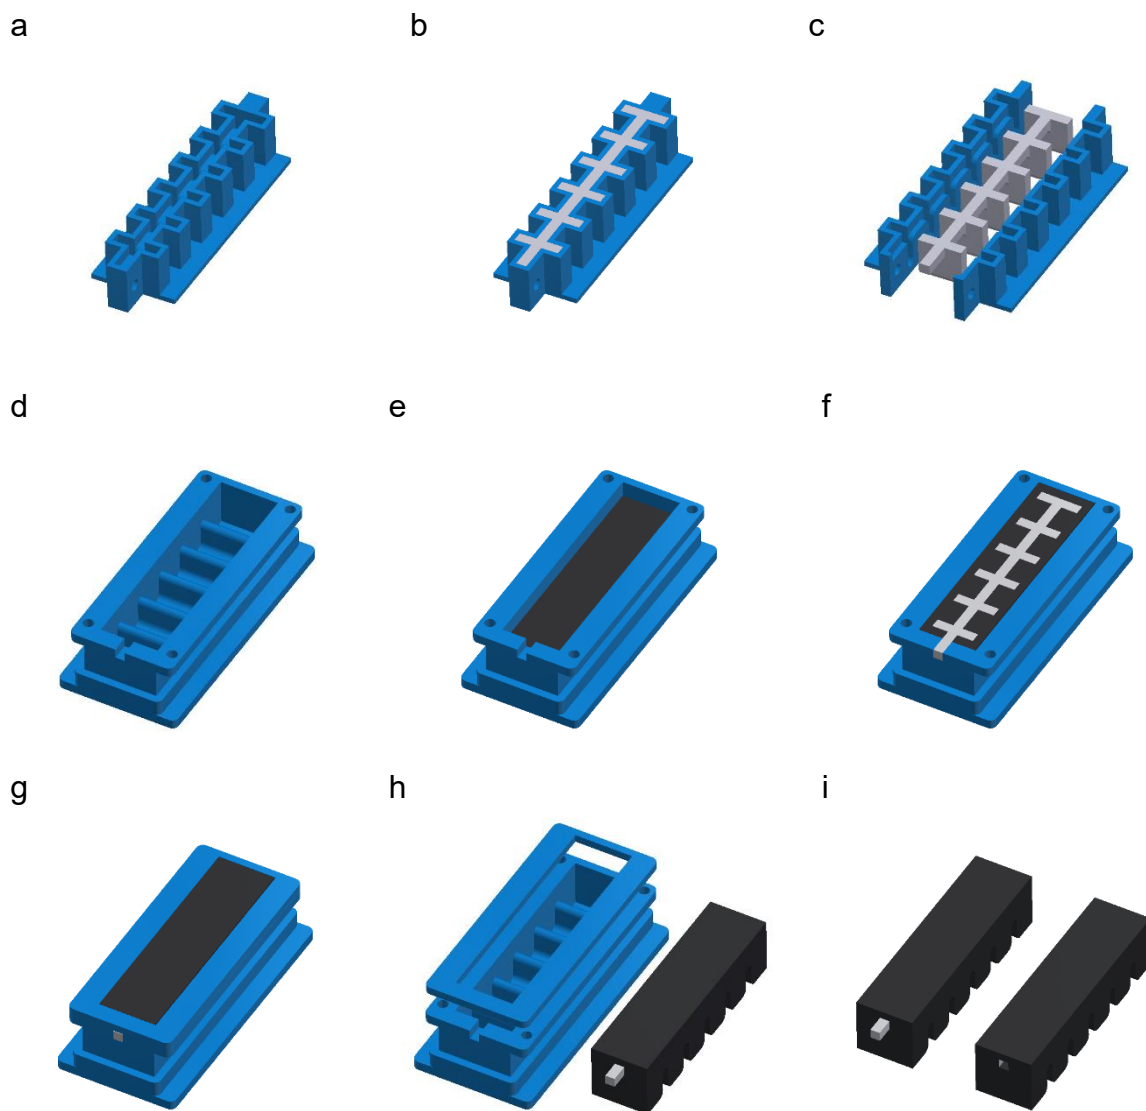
Process of integrated soft finger fabrication (a) The wax core mould. (b) Pouring the melted liquid wax into the mould, cooling and consolidating. (c) Unmoulding the wax core. (d) Assembly of the cavity mould. (e) Pouring prepared composite to the cavity mould. (f) Placing the wax core into the mould. (g) Adding the top mould on. (h) After curing at 45°C for 1 hour, unmoulding the integrated finger and trimming the edge. (i) Removing the wax core.
